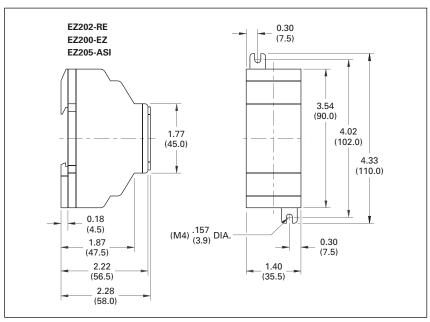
EZ202-RE/EZ200-EZ/EZ205-ASI Series Dimensions in Inches (mm), Drawing Number MD05013012E
